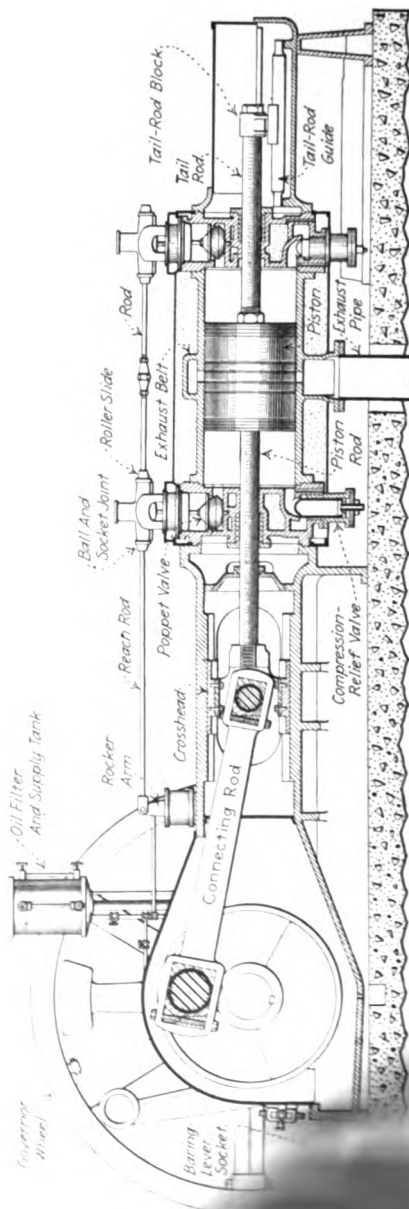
Longitudinal section through cylinder of a Chuse uniflow engine. (Chuse Engine & Manufacturing Co.)
